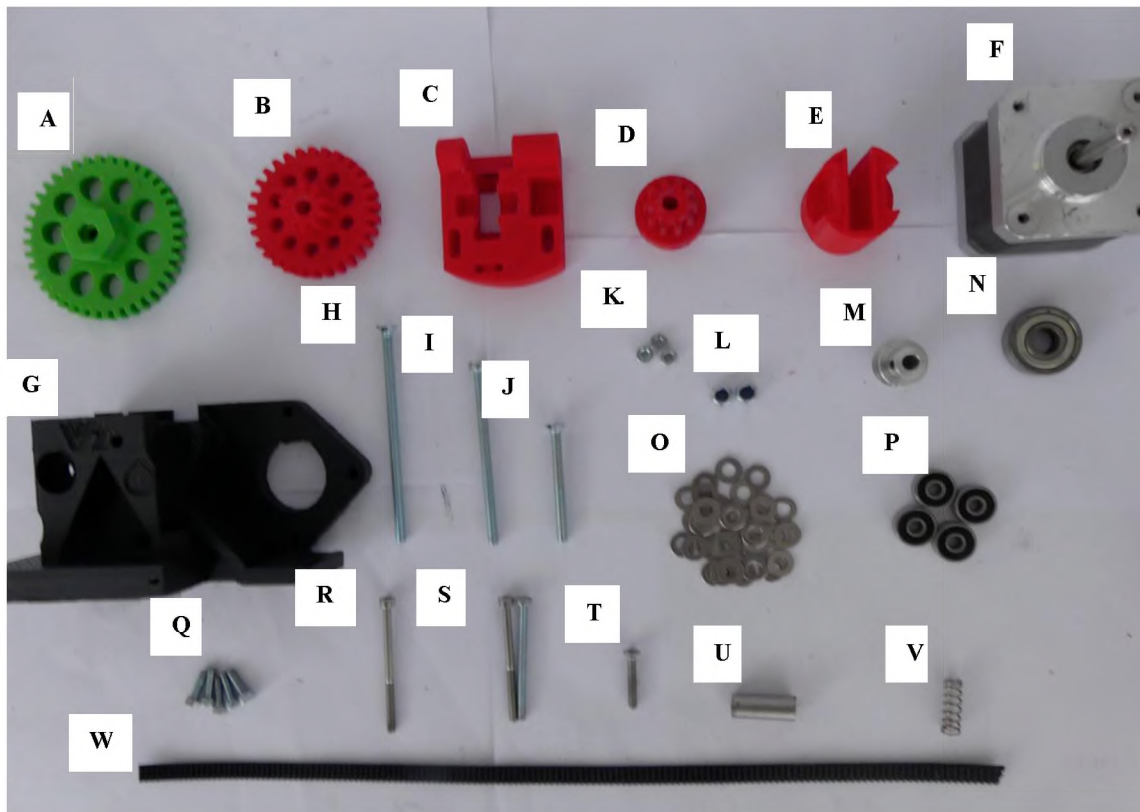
Required components for universal paste extruder assembly. A: Printed large gear. B: Printed double gear. C: Printed idler. D: Printed drive gear. E) Printed syringe cap. F: NEMA 17 stepper motor (with extended wires). G: Printed extruder body. H: M4 x 75 mm screw. I: M4 x 60 mm screw. J: M4 x 35 mm screw. K: M3 nuts. L: M4 nutlocks. M: GT2 pulley (with grub screws). N: 608 bearing. O: M4 washers. P: 623 bearings. Q: M3 x 10 mm screws. R: M3 x 45 screw. S: M3 x 40 mm screws. T: M3 x 20 mm screw. U: M8 x 20 mm smooth rod. V: 15 mm spring. W: 30 cm GT2 rubber timing belt.
